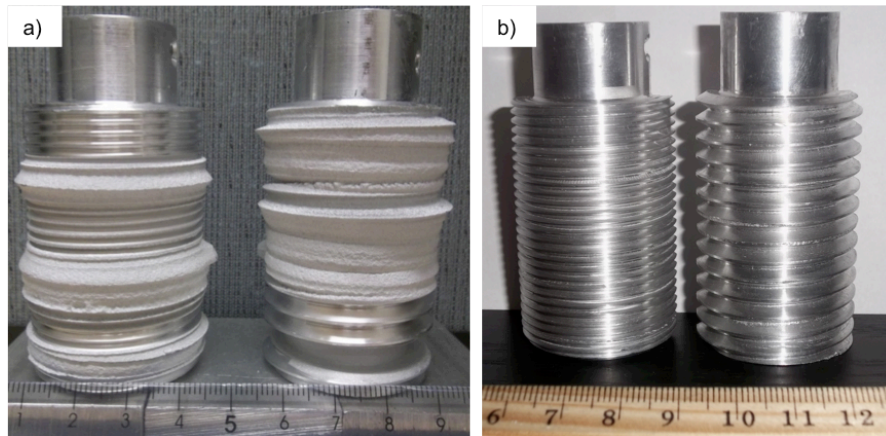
a) Pure aluminum material deposited onto the 38.1 mm diameter part and b) threads machined into the cold sprayed material.
